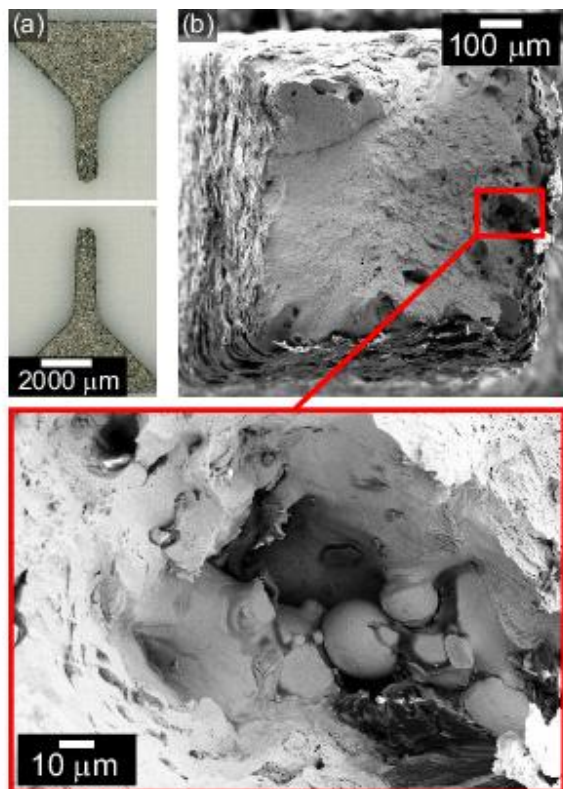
Representative post-test tensile specimen fracture shape and fracture surface characterization. (a) Image of the fracture shape of tensile specimen LTA04 and (b) corresponding SEM micrograph of fracture surface with call-out showing a close-up image of the fracture surface morphology. Poorly sintered areas are visible in this region.
